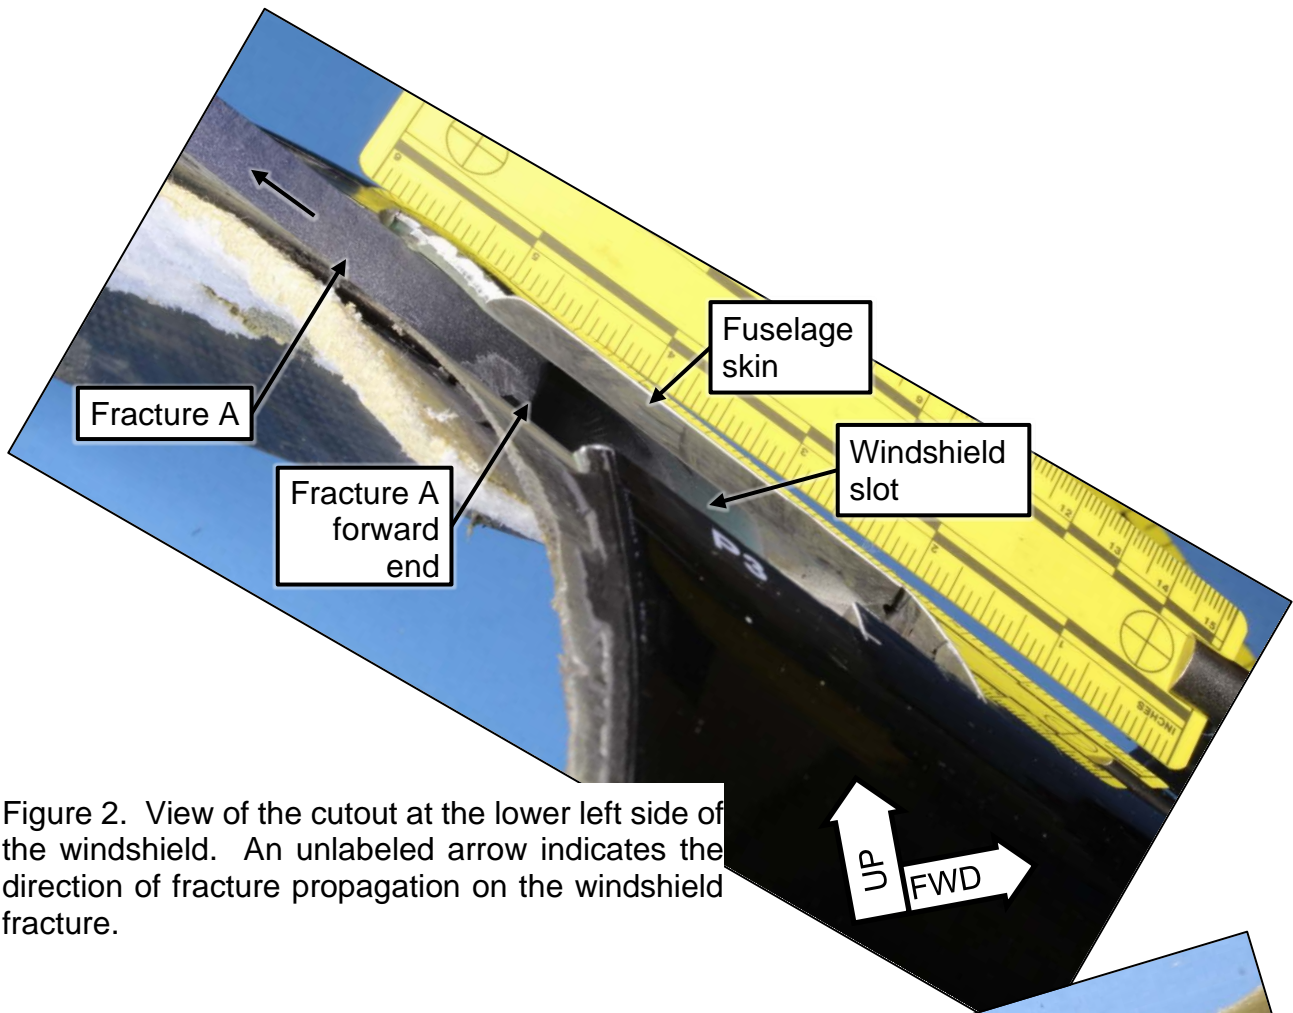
View of the cutout at the lower left side of the windshield. An unlabeled arrow indicates the direction of fracture propagation on the windshield fracture.
